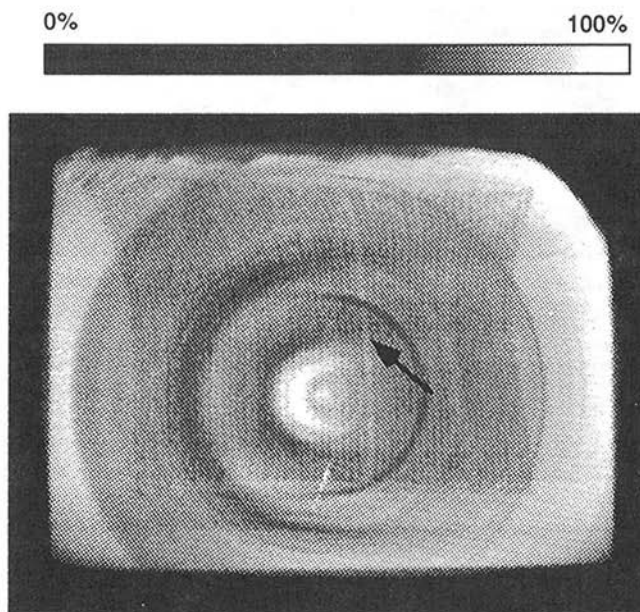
High-resolution Tomoscope image of a fracture surface specimen cut from a failed MMC ring
